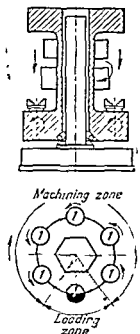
Principle of the semiautomatic multiple-spindle vertical continuous-type chucking machine
